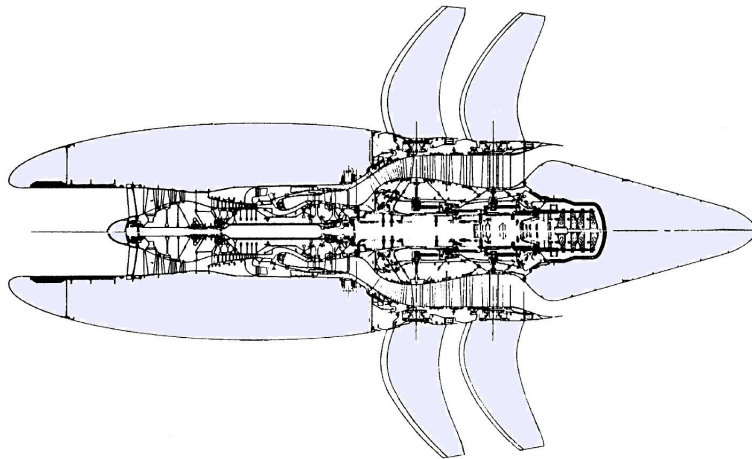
The GE-36 UDF engine: lateral view (source: ref. [11]).
